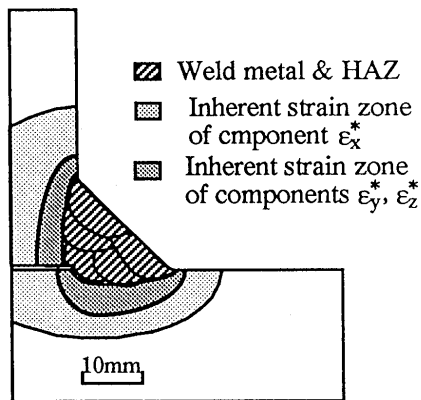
Inherent strain zones in a multipass fillet weld
